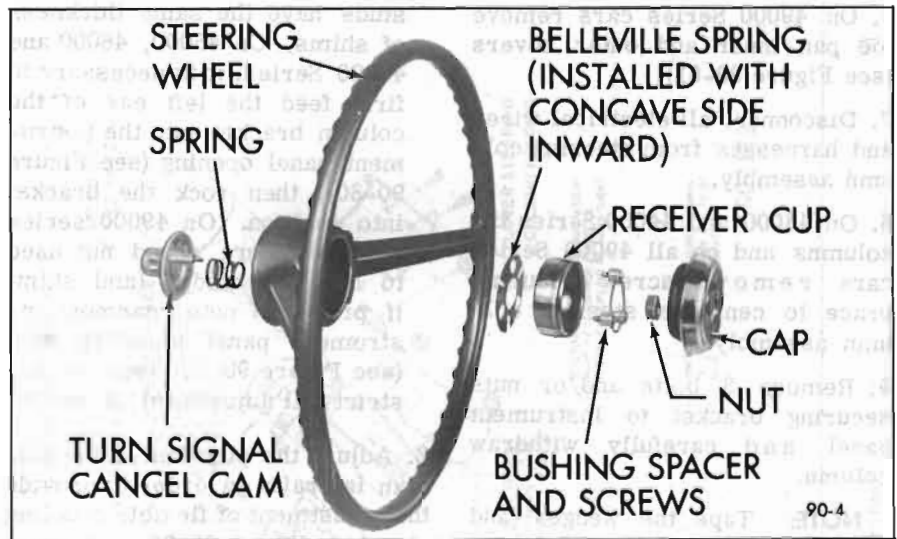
Horn Actuator Cap Installation (43000-44000 Series)
